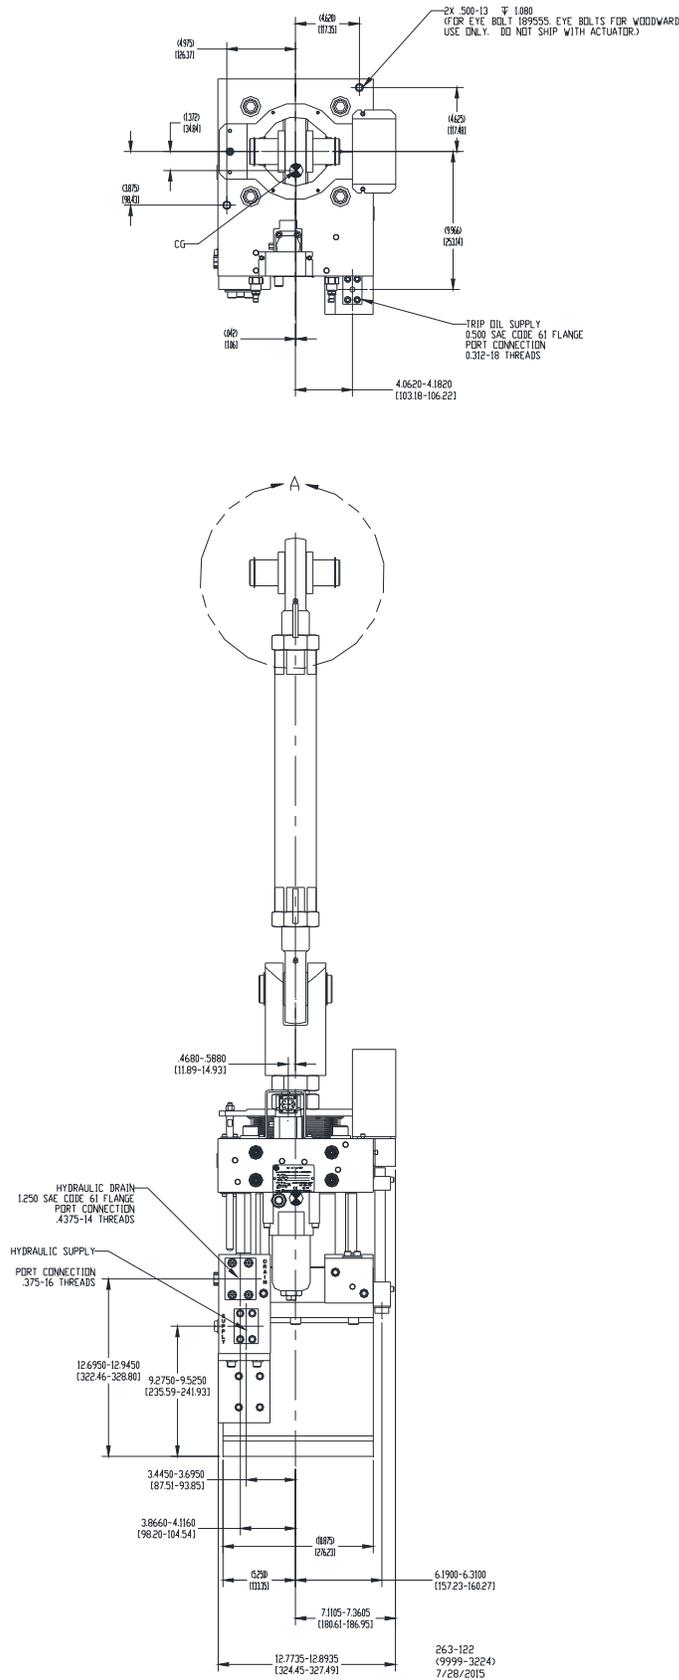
9F IGV Actuator, High Pressure Trip, Triple LVDT without Internal Check Valve (front and top views)
